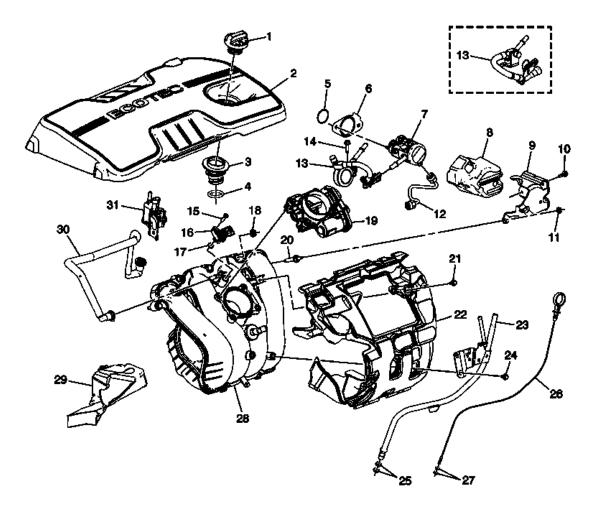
Exploded View Of Intake Manifold And Components Courtesy of GENERAL MOTORS COMPANY
